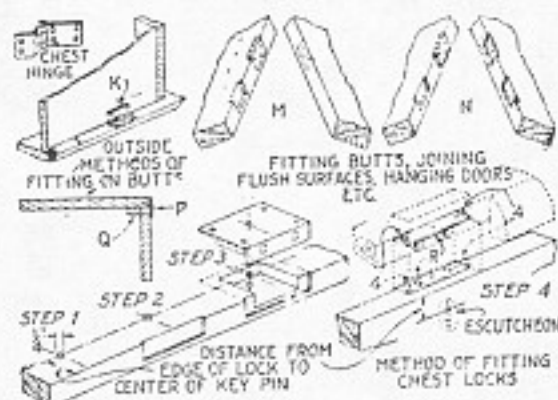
A chest hinge; various methods of applying butt hinges; the steps in fitting a chest lock.
